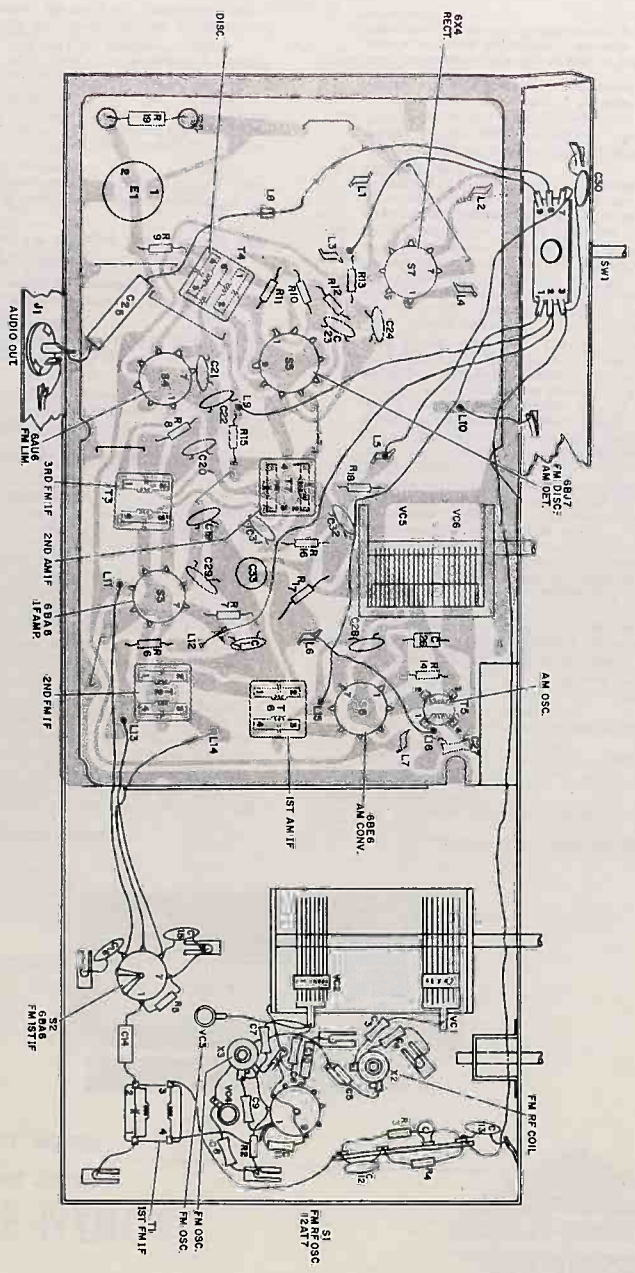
Bottom View—Showing Components, Tube Locations and Tie Lugs
